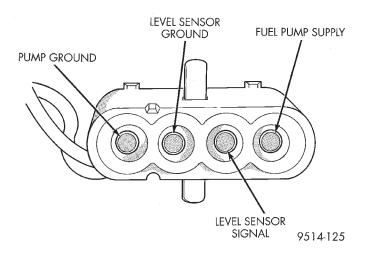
Fuel/Pump/Level Sensor Electrical Connector
